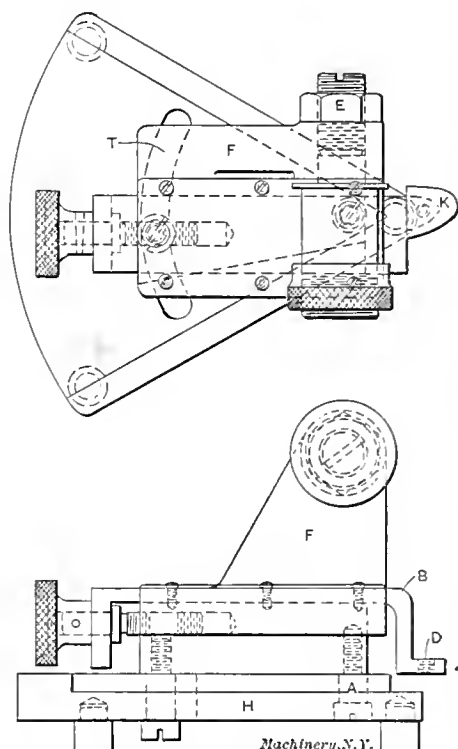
Device for Grinding Formed Fluting Cutter shown at B, Fig. 1.
